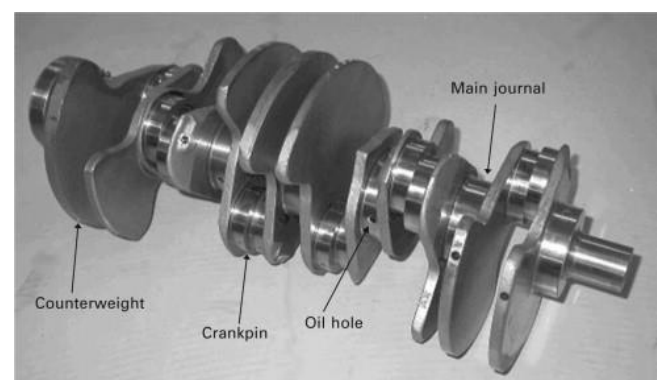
Monolithic crankshaft for a four-stroke engine. The fueling holes are for lubrication.
